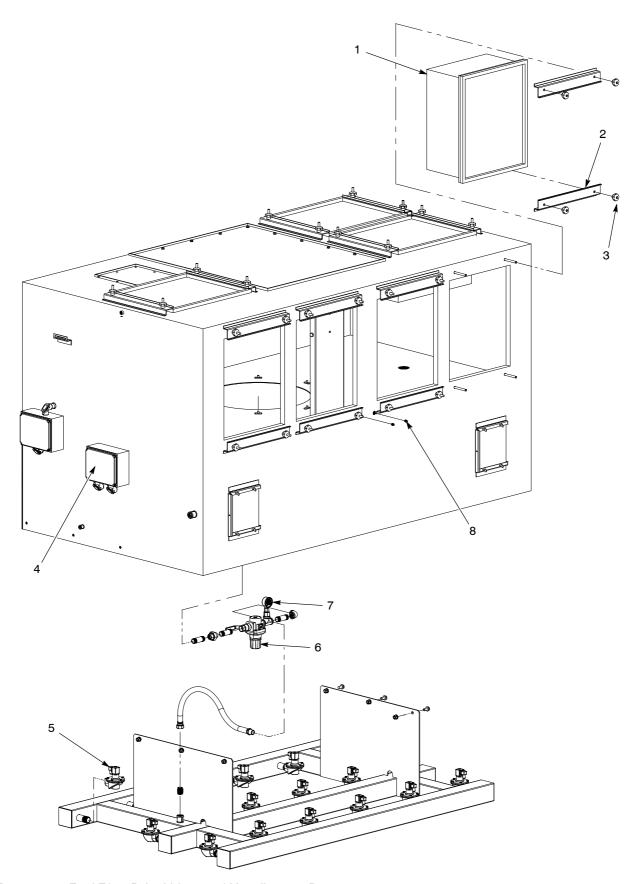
Final Filter, Pulse Valves, and Miscellaneous Parts
